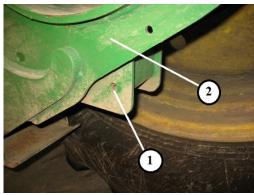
Jack Stand Bracket Key 1 – ½" Hole (to be drilled to ¾") Key 2 – Windrower Main Frame
